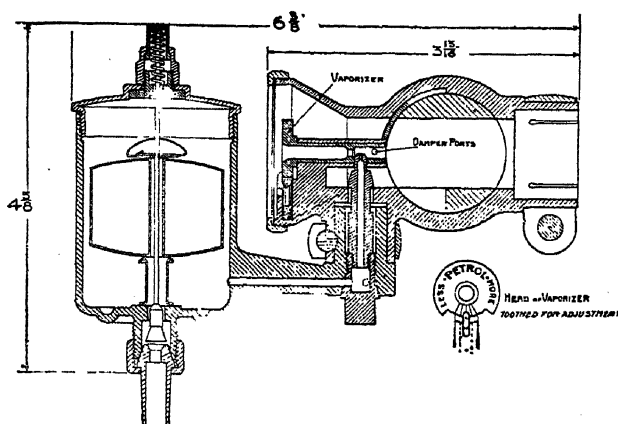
Sectional View of the Senspray Carburettor, showing the Atomizer, Damper Ports, and Cylindrical Throttle.
